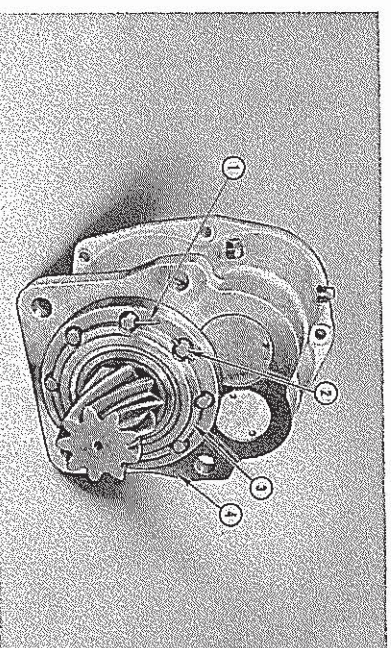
BEARING RETAINER AND CAPSCREWS
